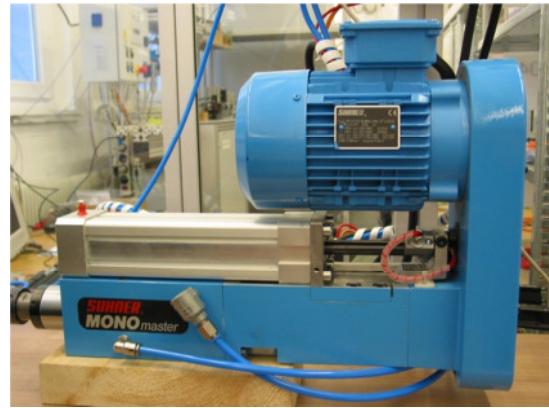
Suhner ERdrill - A pneumatic actuated drilling machine with integrated Smart PID System from FLUDICON
